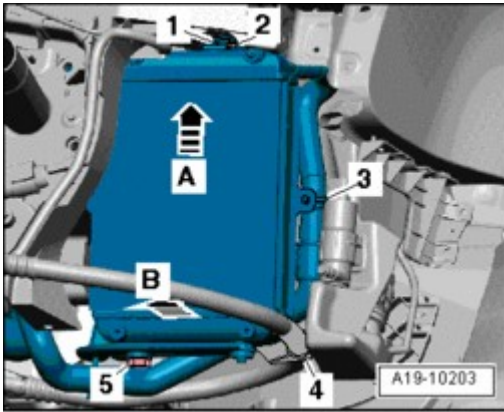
Removing Upper Lock Carrier Bolt, Lower Mount Bolt, Coolant Line And Refrigerant Line From Brackets & Disengaging Bracket
